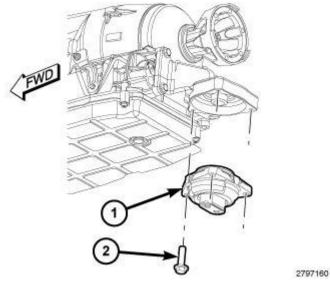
Rear Engine Mount Isolator & Bolts (4x2) Courtesy of CHRYSLER GROUP, LLC
